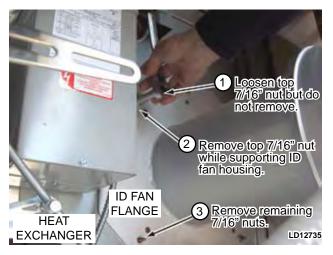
REMOVE ID FAN FLANGE FROM HEAT EXCHANGER
